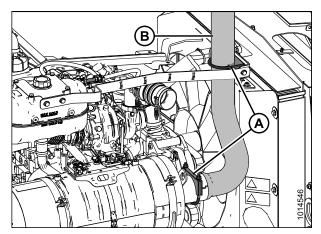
Exhaust Stack under Hood (Charge Air Cooler Tube and Exhaust Shroud Removed for Clarity)
